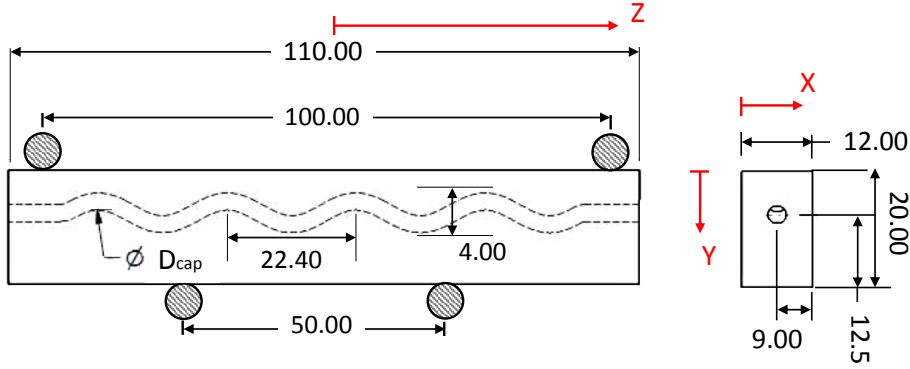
Four point bending fatigue test specimen with sinusoidally shaped capillary. Dimensions in millimeter.
